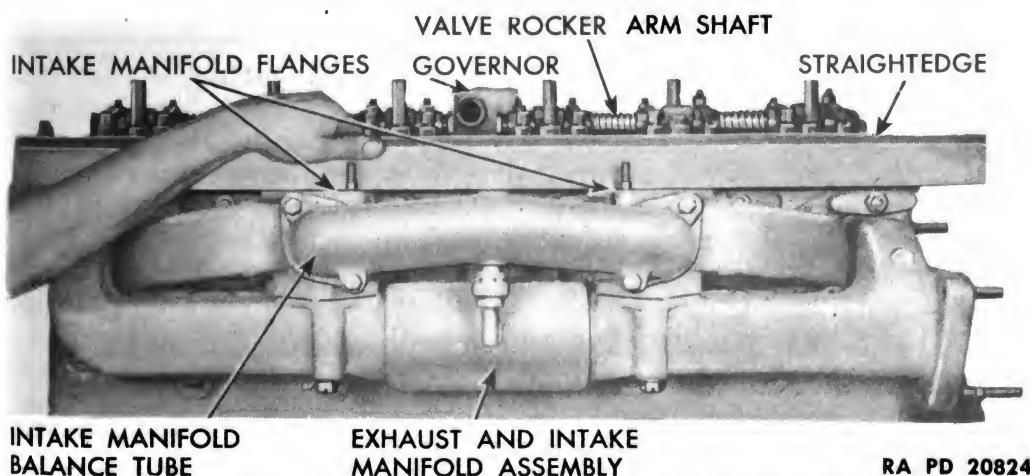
Lining Up Faces of Intake Manifold Flanges
